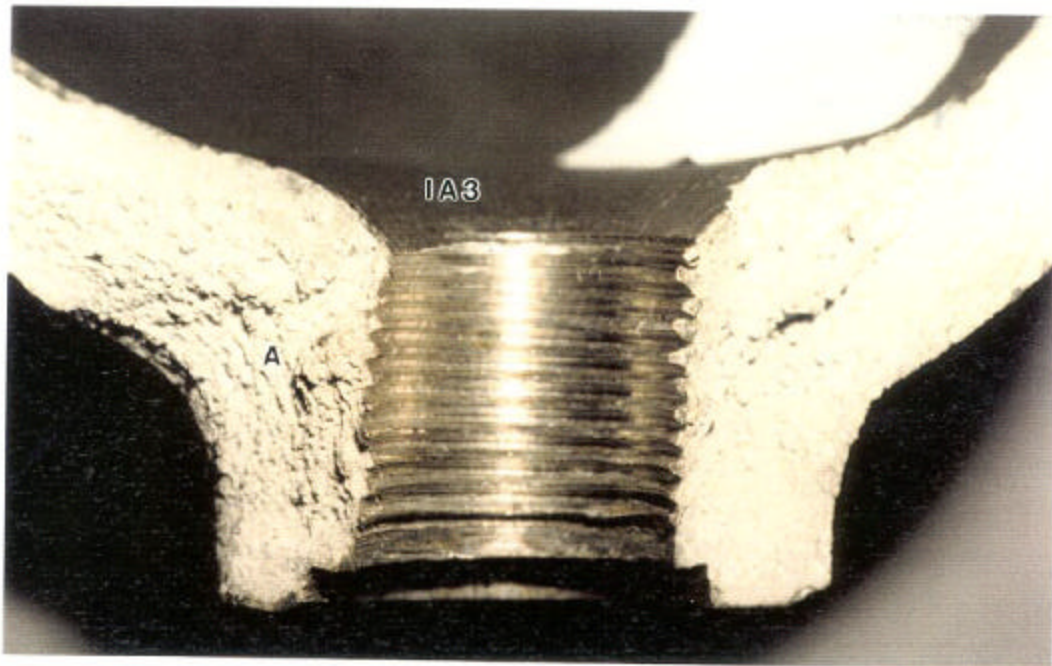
Mating fracture surfaces at the inlet hole.
